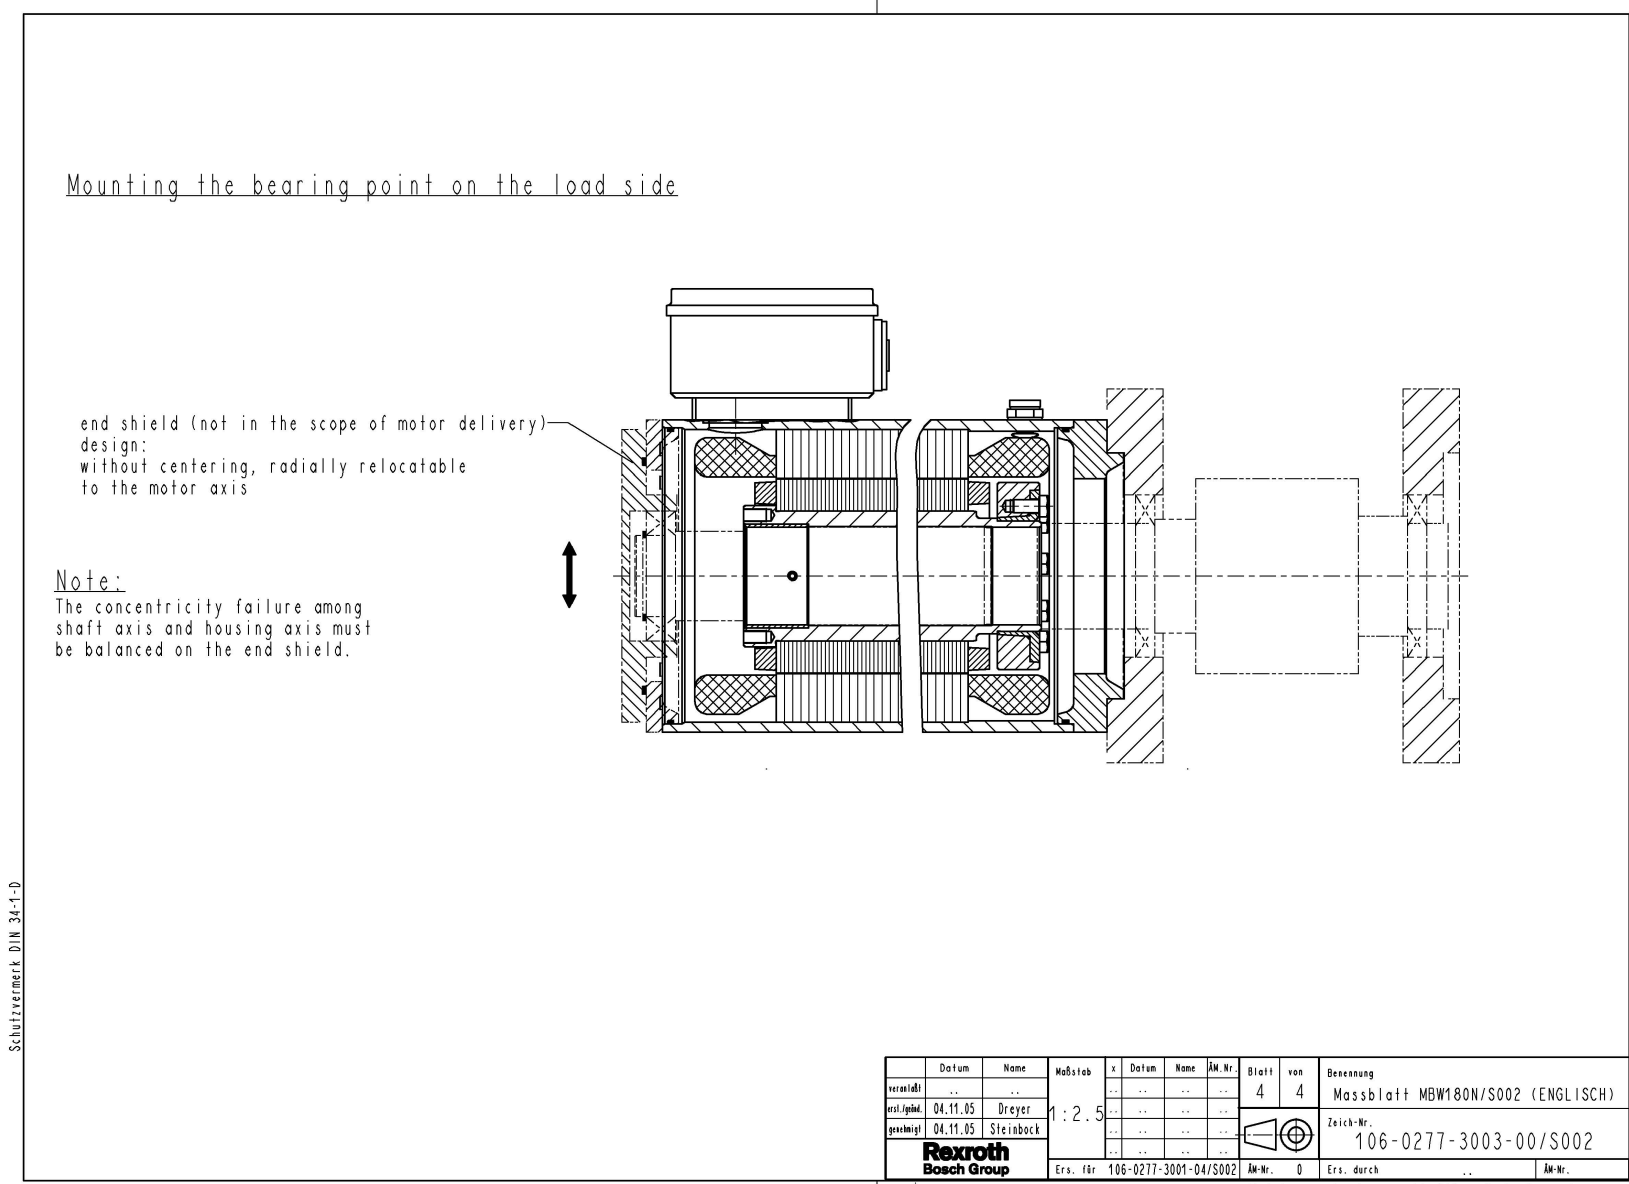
MBW180 / S002 dimension sheet (4/4)
